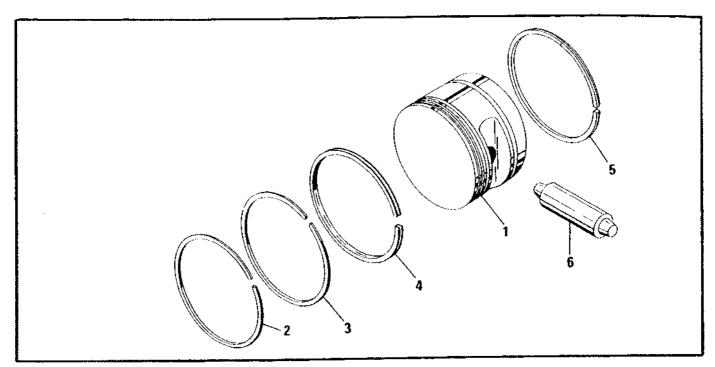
PISTON AND RING ASSEMBLY MODELS 10-470-D,E,F,H,L,M,N,S,U,V
